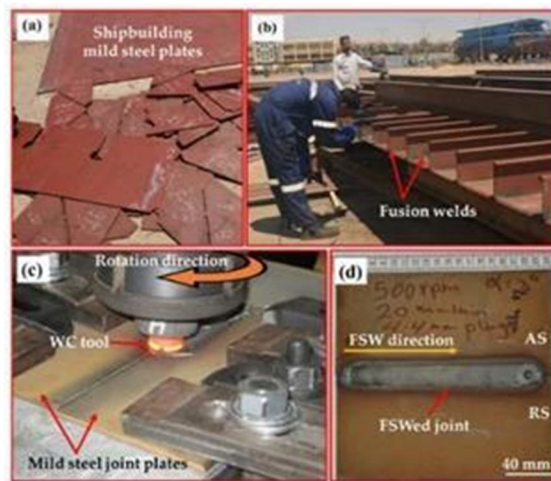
Figure depicts mild steel plates used in shipbuilding (Figure 1a), traditional fusion welding in shipbuilding (Figure 1b), the FSW process of mild steel plates (Figure 1c), and a top view of an FSWed butt joint (Figure 1d) (Figure 1d)
